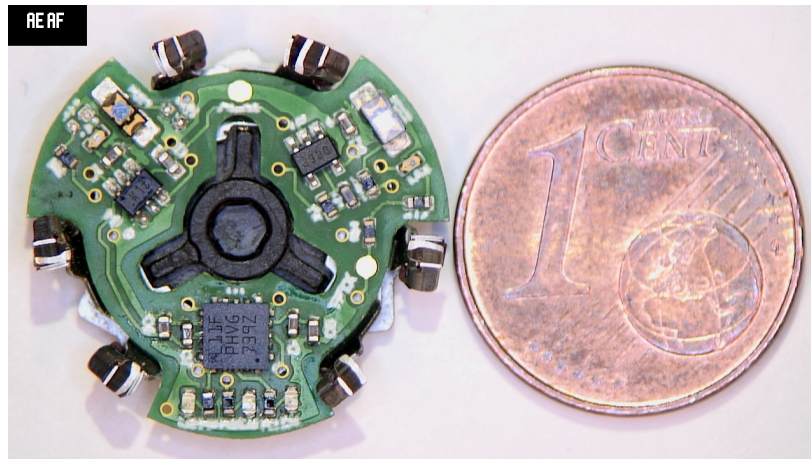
Top view of version 1 PCB (of diameter of approx 1.94cm) mounted on the cutter next to a 1 cent Euro coin for size estimation.
